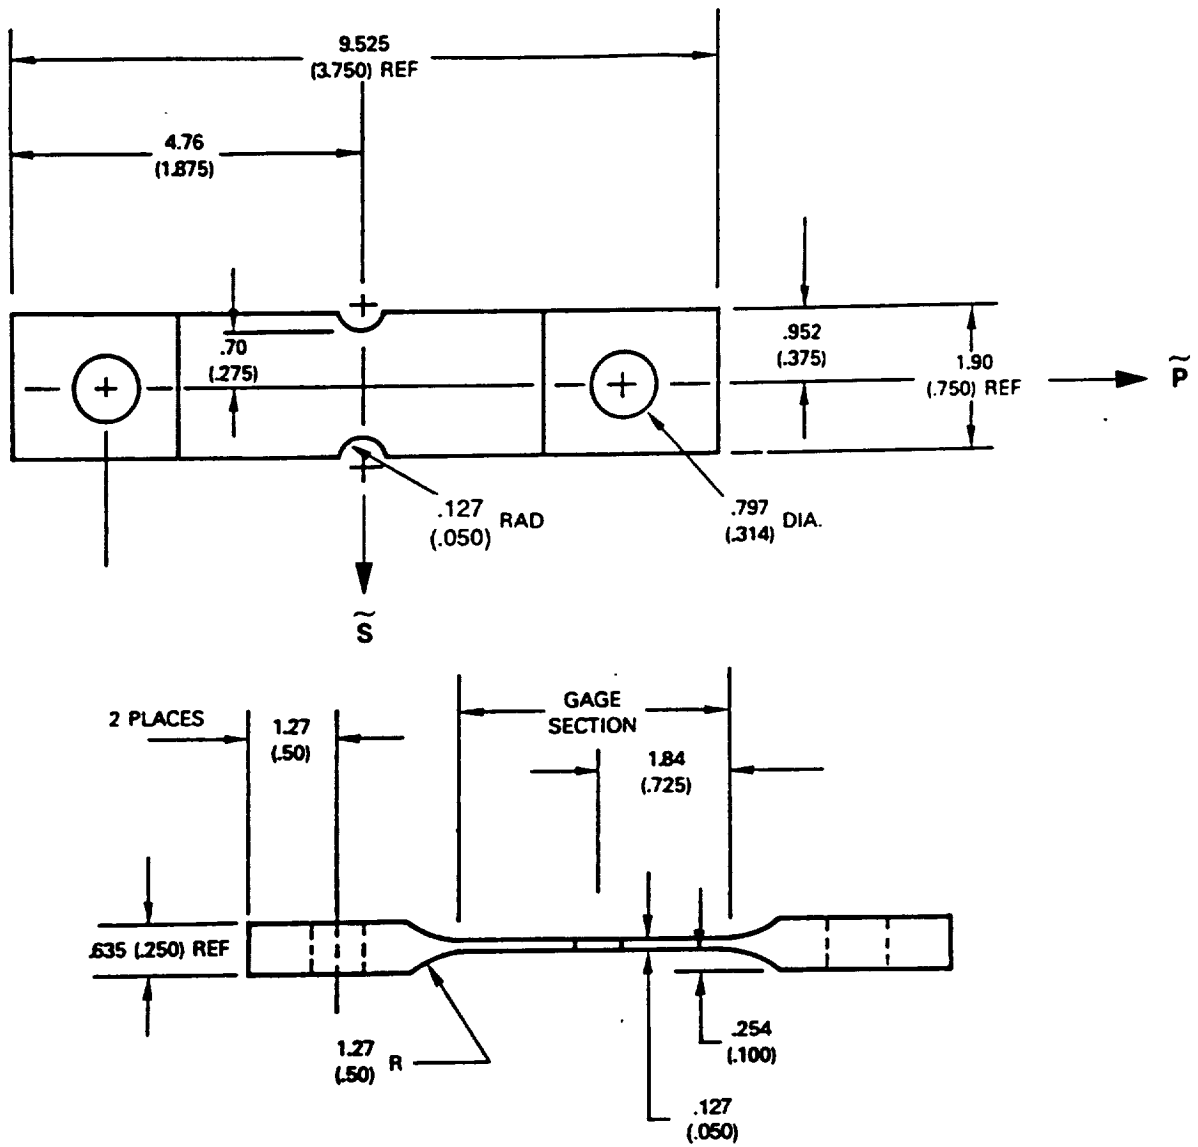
Thin Sharp Notched Fatigue Specimen Geometry - cm (in.)
